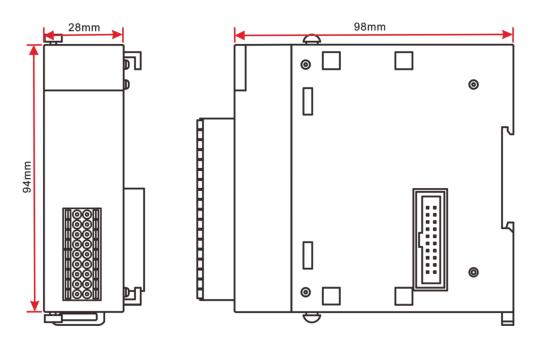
TK6-8HAI-V, TK6-8HAI-C, TK6-8HAO-V, TK6-8HAO-C external dimensional drawings (unit: mm)
